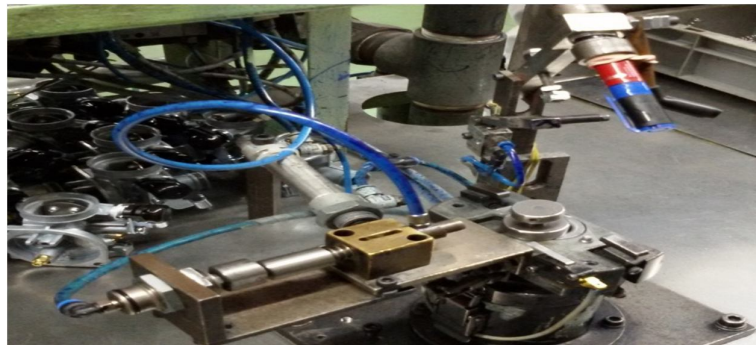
Photograph of Improved Conventional B-Test fixture by Automation
